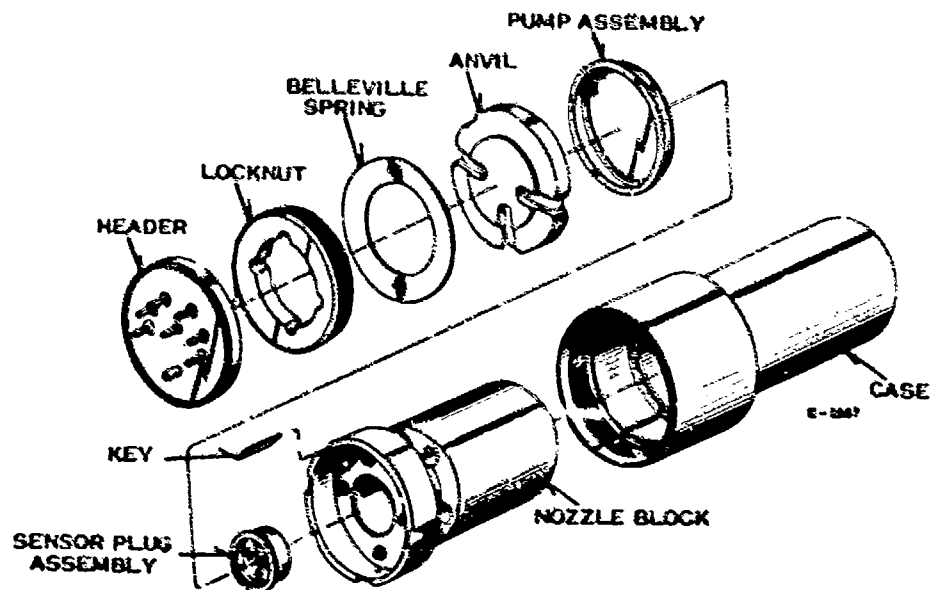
SUPERJET™ SENSOR - EXPLODED VIEW
